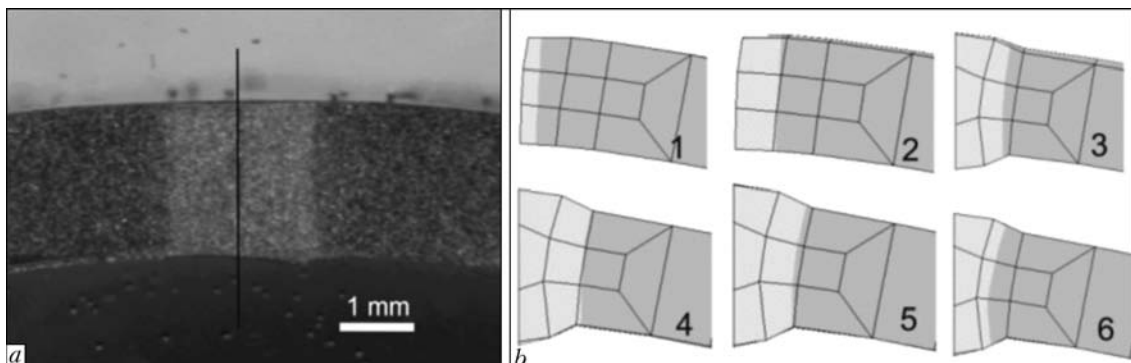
Weld seam macrograph (a), and snapshots of strip edge cross section at positions -60, -30, 0, 30, 60, 90 mm (1–6) relatively to the welding point with the 800 °C isoline (b)
